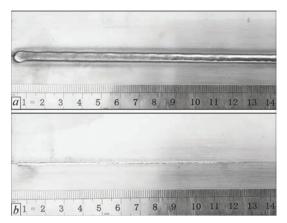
Appearance of butt joint of SUS304 steel ($\delta = 3.0$ mm): *a* — upper bead; *b* — weld root
